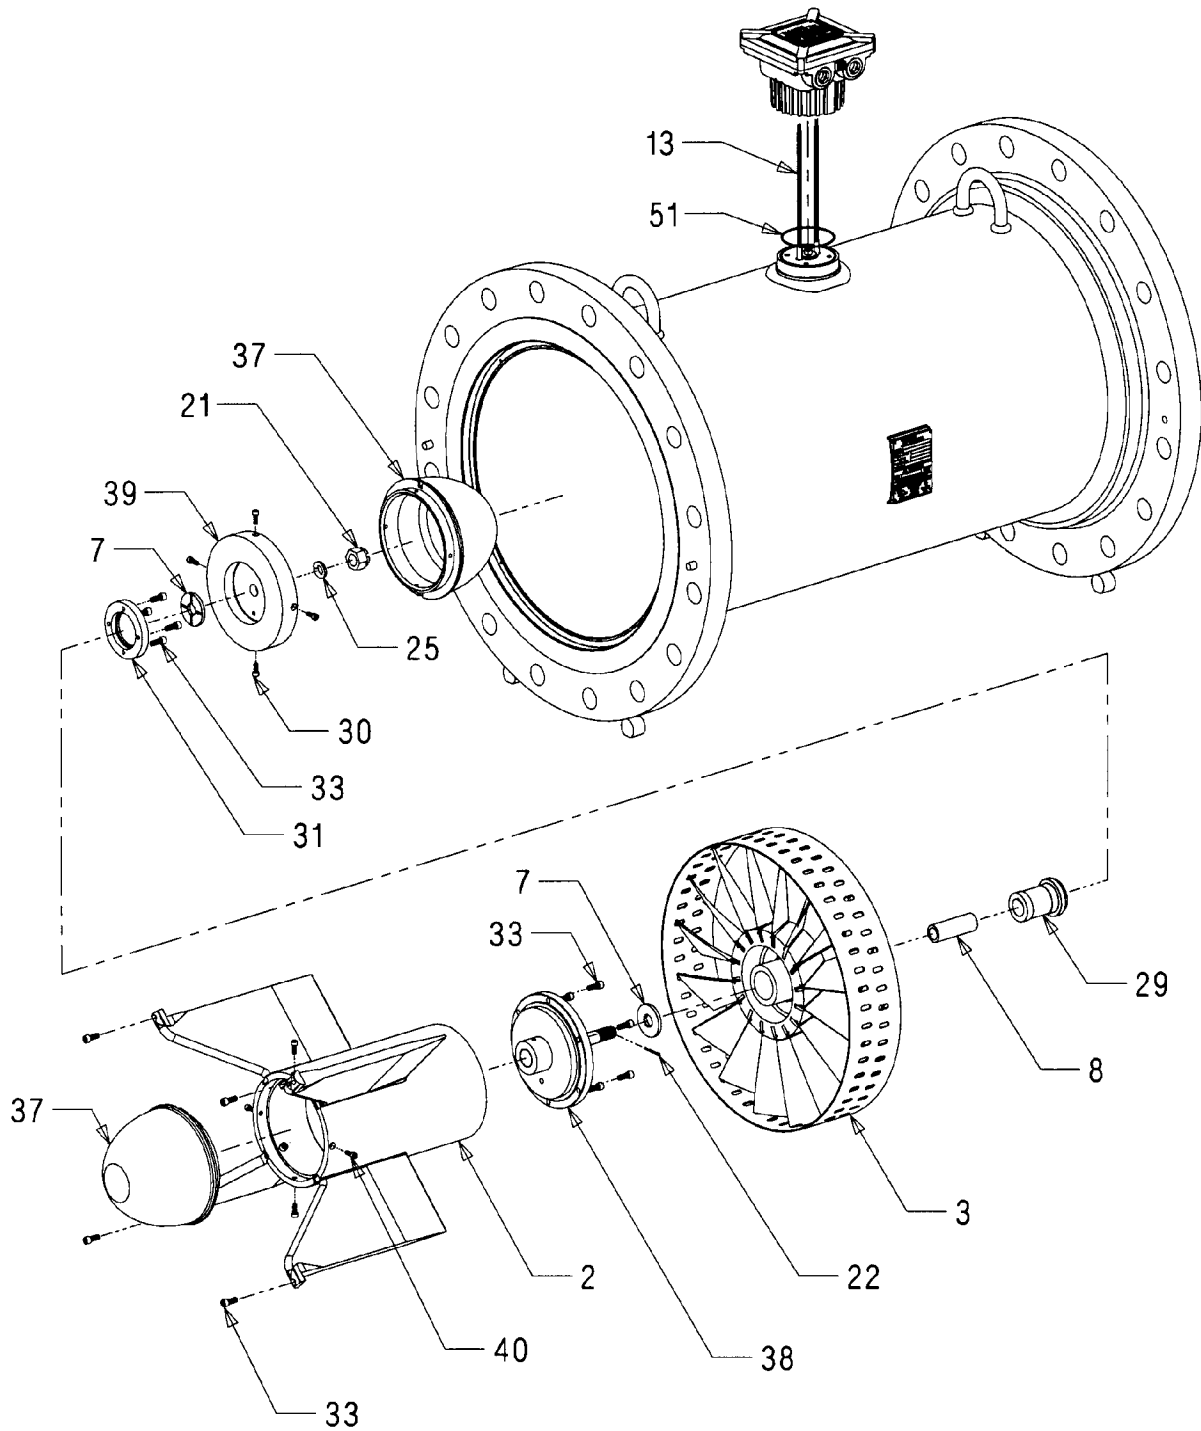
Meter Assembly - Sizes 6" through 16" (Reference Table 7-3)
